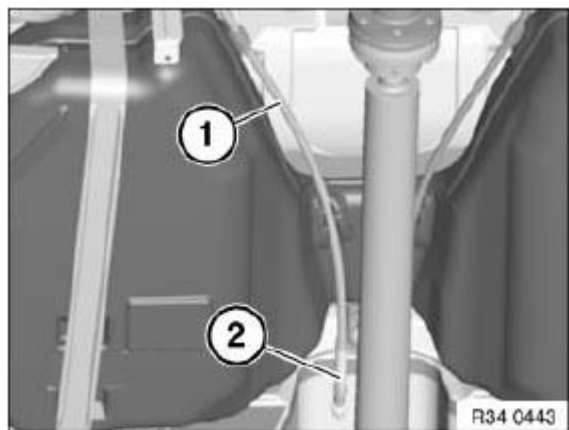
Identifying Handbrake Bowden Cables And Guide
